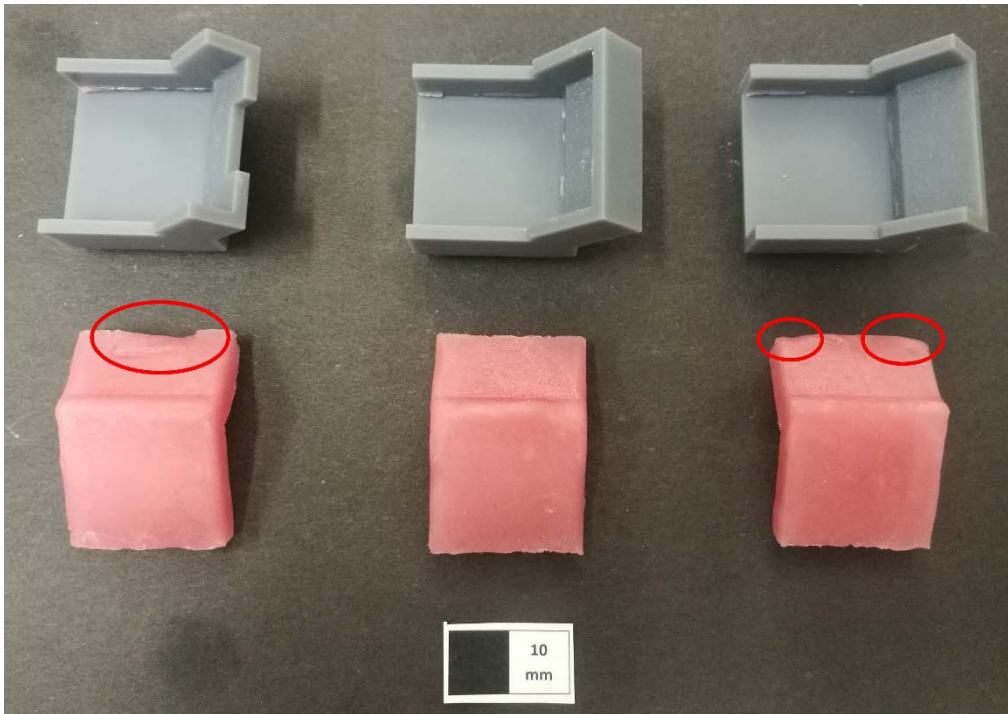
The cured test blocks could be removed from the molds without cylinder design. The test block fabricated by the mold designed in Figure 20c showed the best accuracy (middle). The red circles showed the inaccurate parts of the other two test blocks. (white scale: 10 mm).
